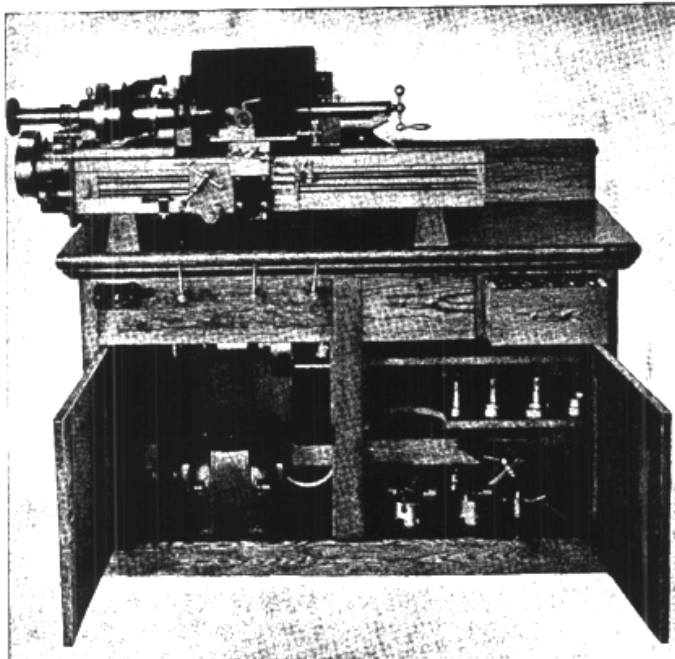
Rivett 608 (S-C) Lathe on Cabinet with Horizontal Safety Drive Countershaft and Jackshaft
